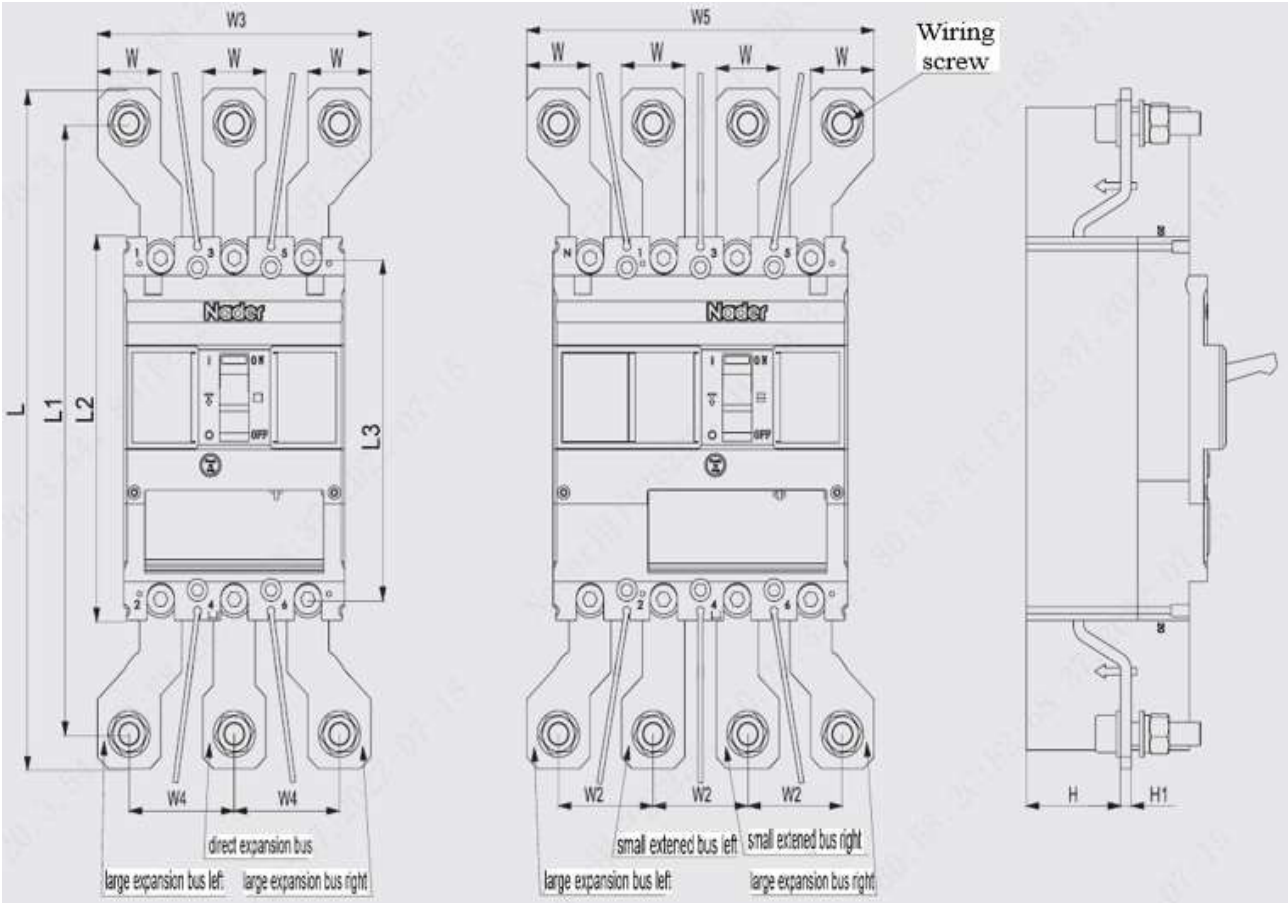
Outline and installation dimensions of expansion wiring in front of the board
